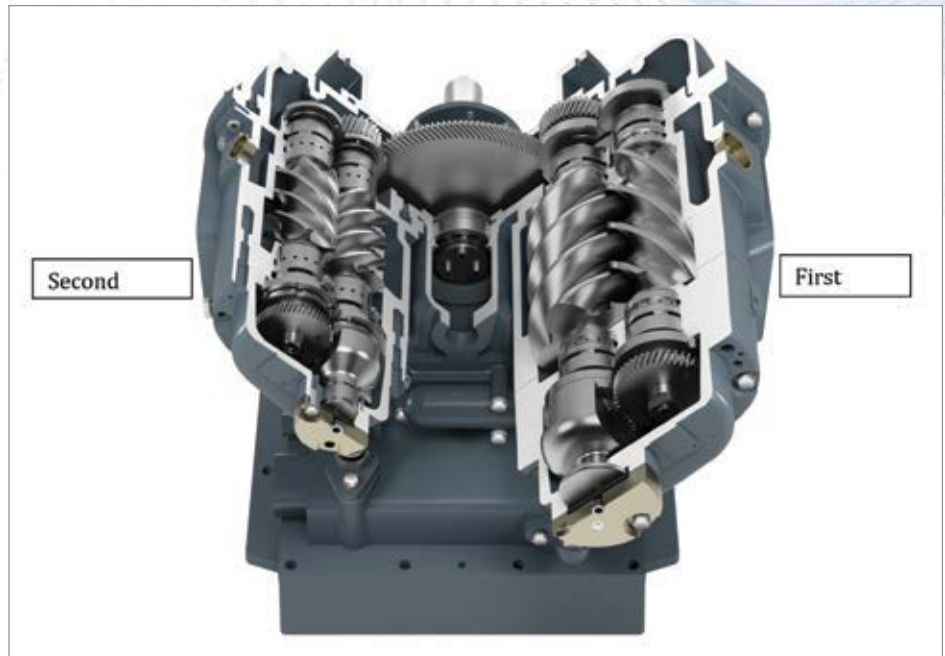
A cutaway of a typical oil free rotary screw air compressor.
